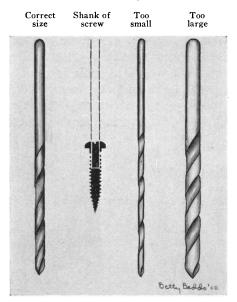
Diagram demonstrating correct size of drill to use in making screw-hole. Drill must be exact diameter of the shank of the screw.
